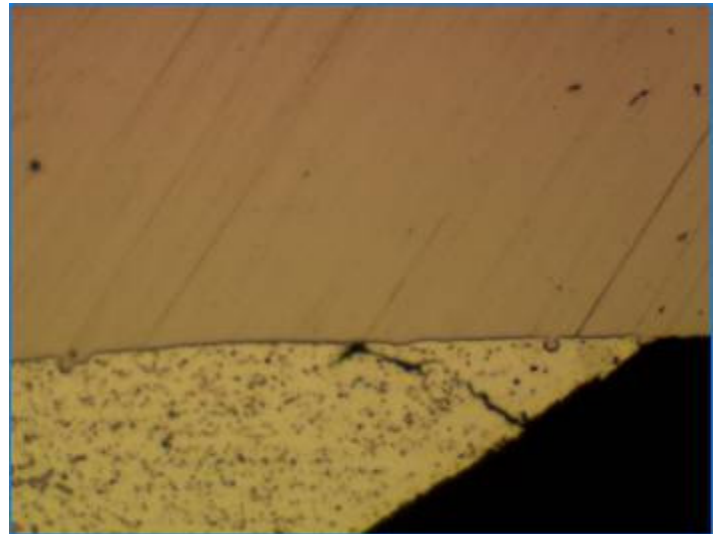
cross section, SN66, U61, left lead solder crack, 400x
